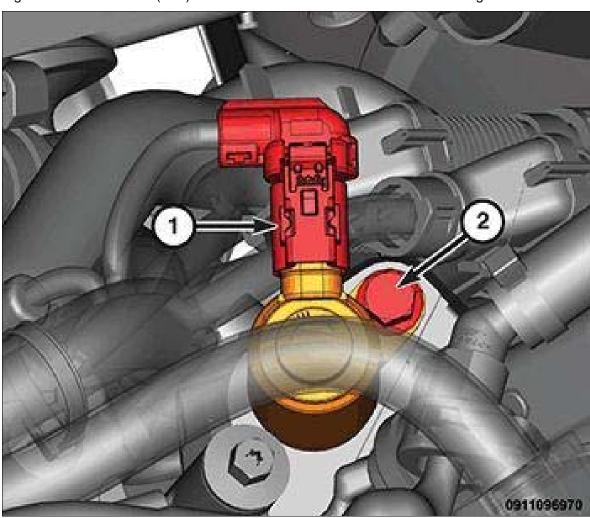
Variable Valve Lift (VVL) Solenoid Wire Harness Connector & Retaining Bolt
